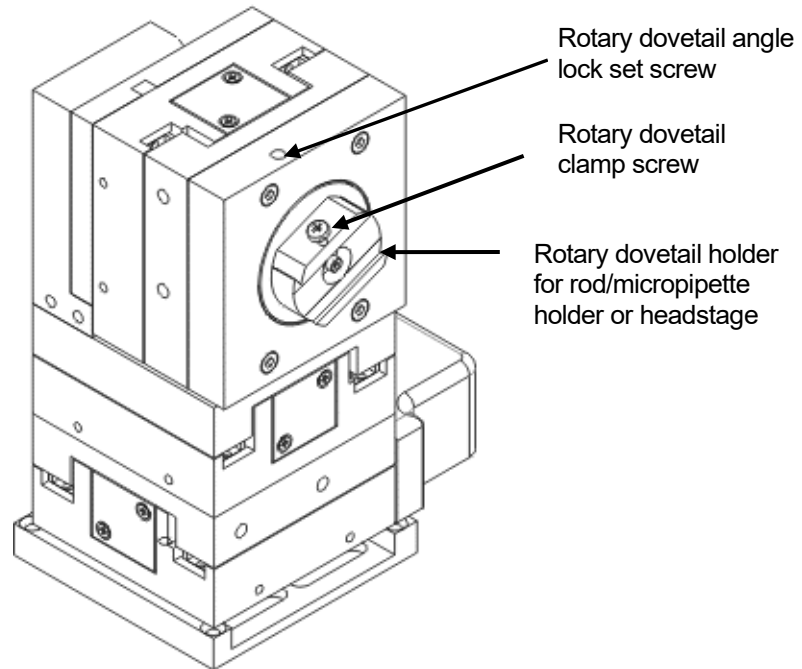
Angled side view of TRIO MP-245/M to change headstage mount
